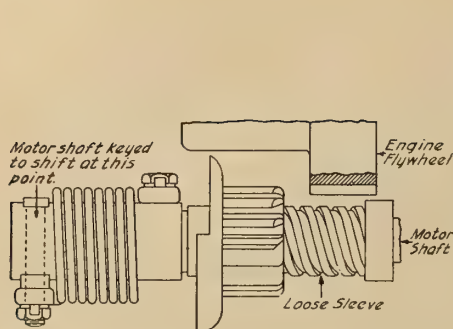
SPRING DRIVE SHIFT (INBOARD)
